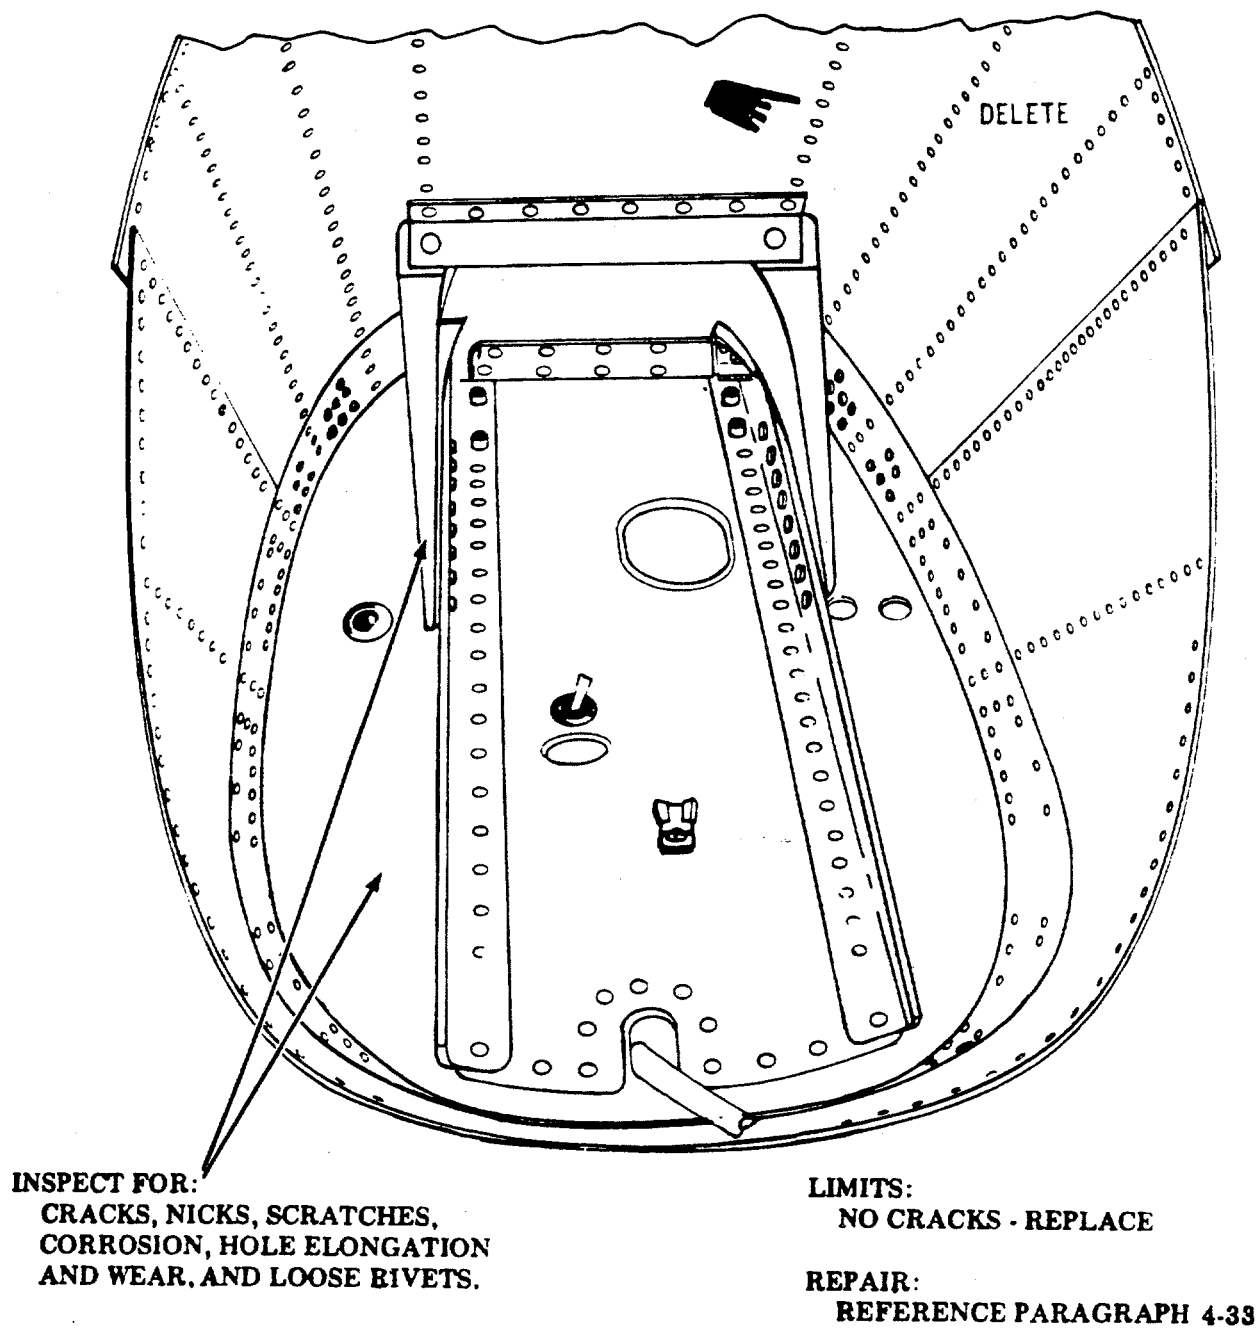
CANTED BULKHEAD AND 42° GEARBOX SUPPORT FITTING
